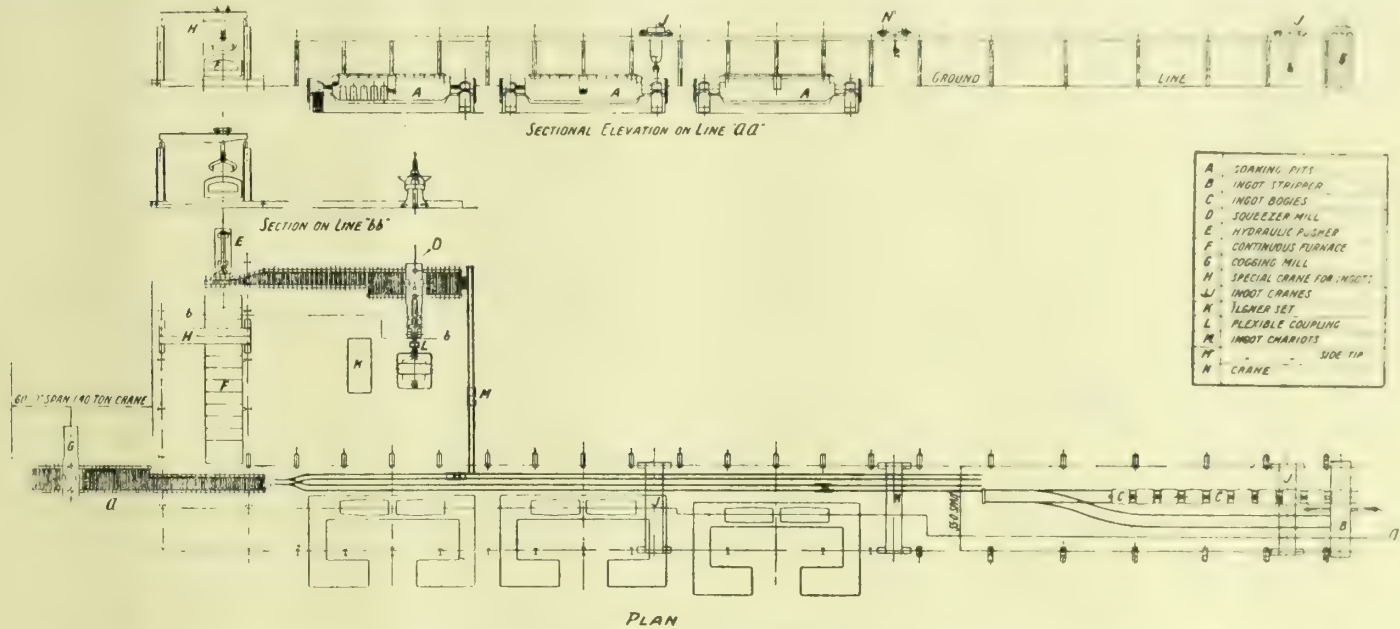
ARRANGEMENT OF SQUEEZER MILL.
